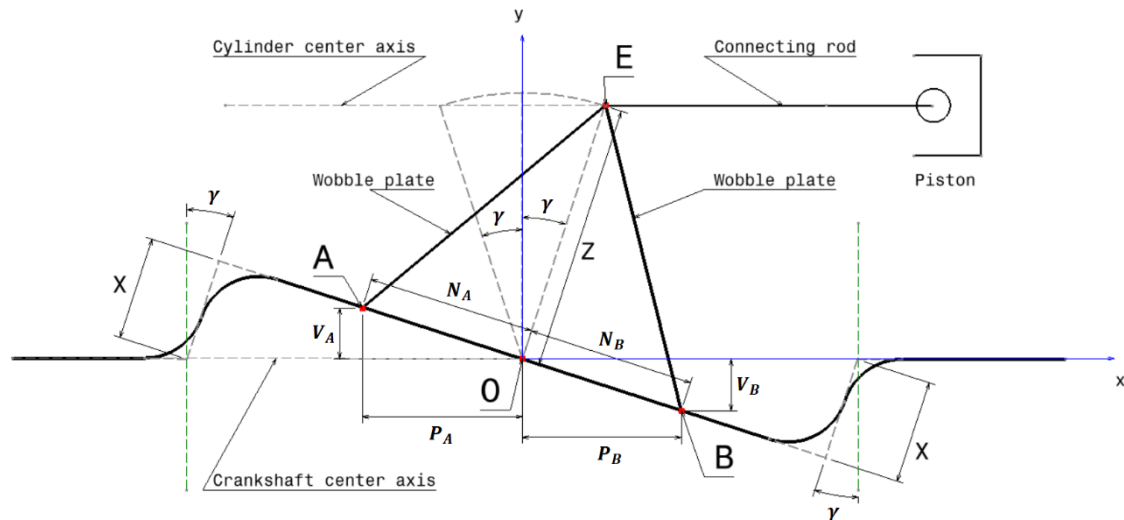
Crankshaft/wobble plate joint bearings A and B coordinates
